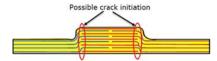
Schematic drawing of a multi-overlapped joint with possible crack zones highlighted
